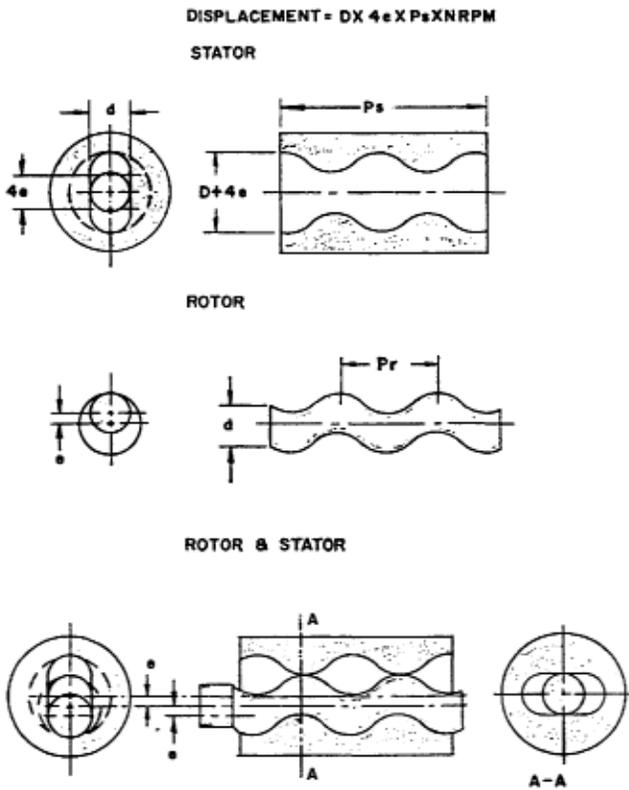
Progressing cavity pump is a single helical rotor rolling eccentrically in a double threaded helix of twice the pitch length
